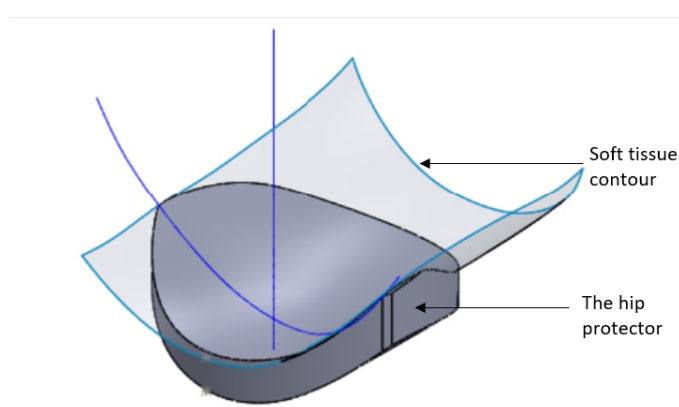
The 3D printed hip protector modeled according to a hip surface geometry.
